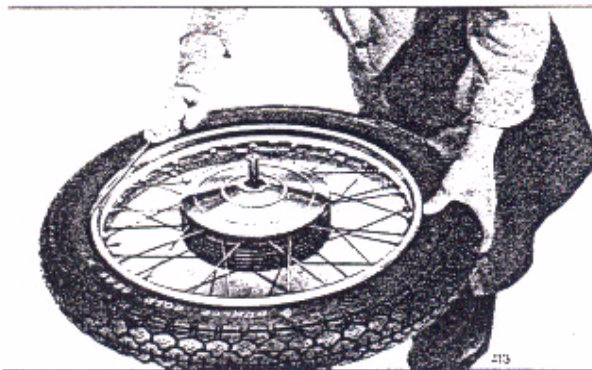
Removing the first bead of the tyre—Lever inserted close to valve whilst bead is pressed into well on opposite side of wheel
